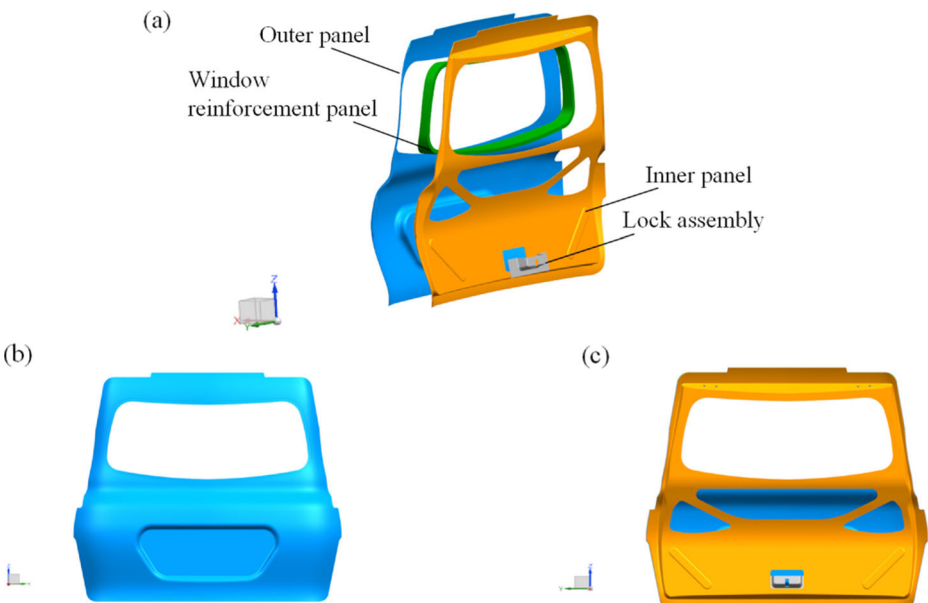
Original DP 590 steel hatchback CAD model: a exploded view b front view c rear view
